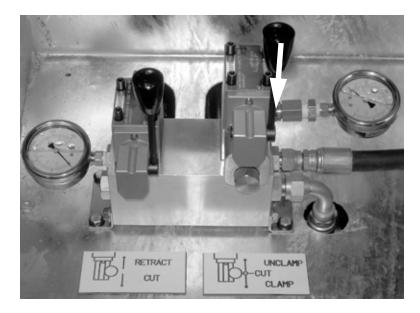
Pull the Clamping lever toward you to clamp the machine in place inside the casing. Return the lever to the center position.
